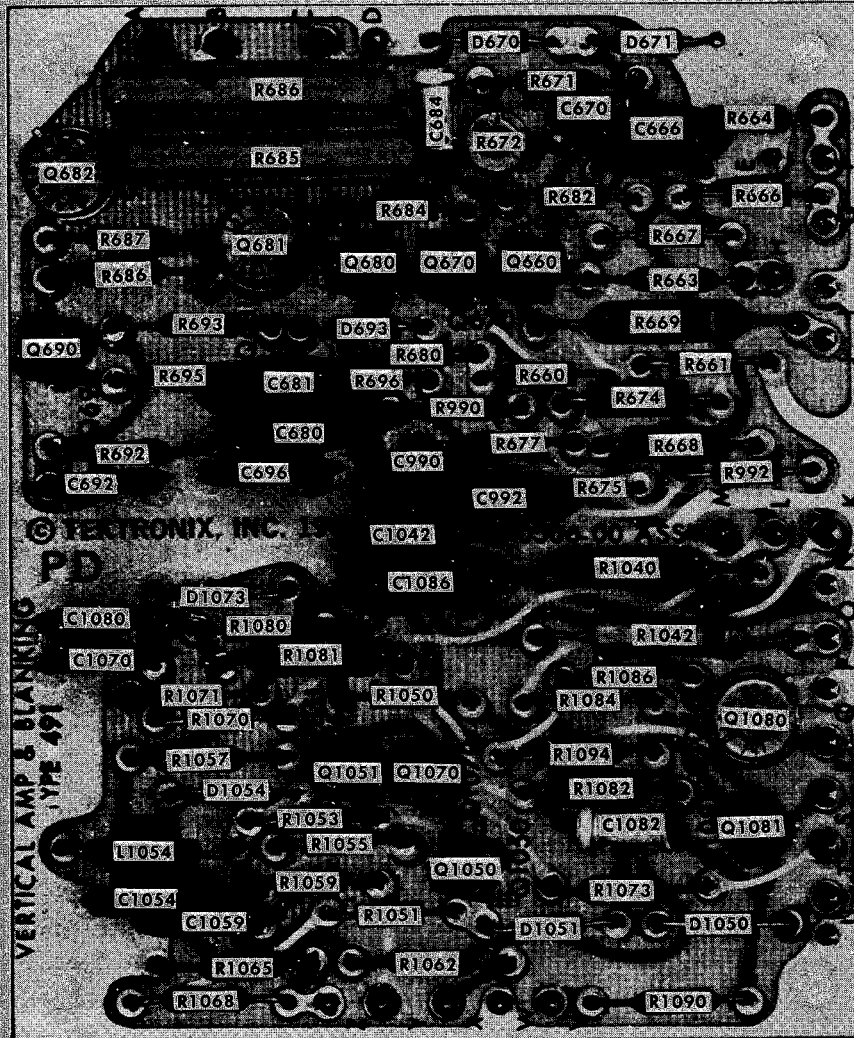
Vertical Amplifier and Blanking board assembly with component call out.
